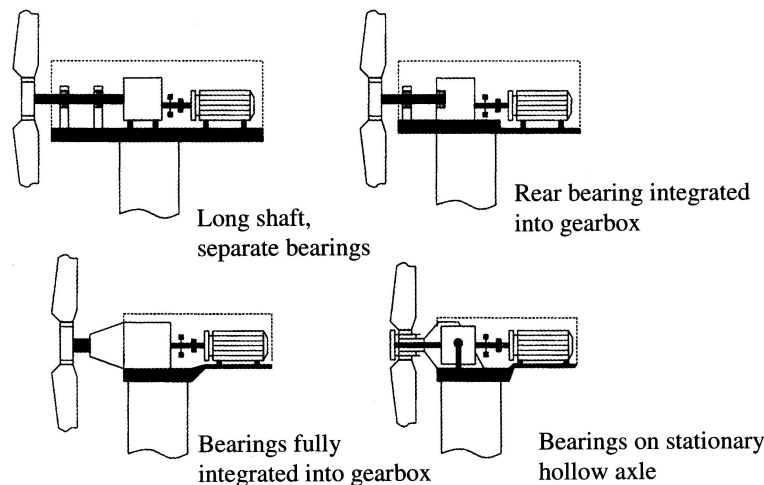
Main Shaft Options. Four possible configurations for coupling the turbine rotor to generator rotor shaft through a gearbox, usually for medium to large scale wind turbines. Figure taken from Ref. [21].
